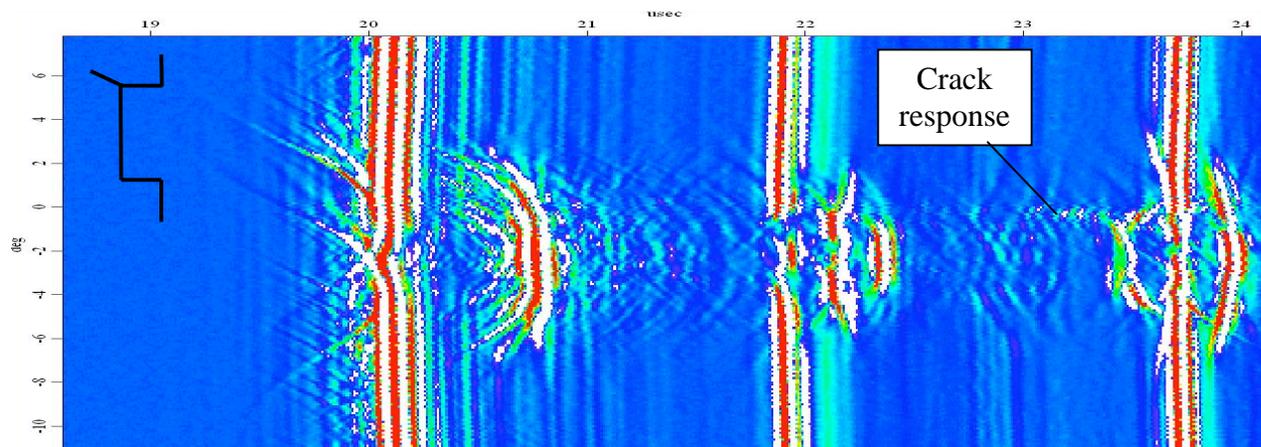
Circumferential NB PE B-scan of rectangular ID axial notch 0.5mm deep and 2.5mm wide with fatigue crack 0.8mm deep at the notch edge. Probe: FL=55mm, f=15MHz, D=0.5”, WP=15mm. Color scale is shown in Fig. 1.
